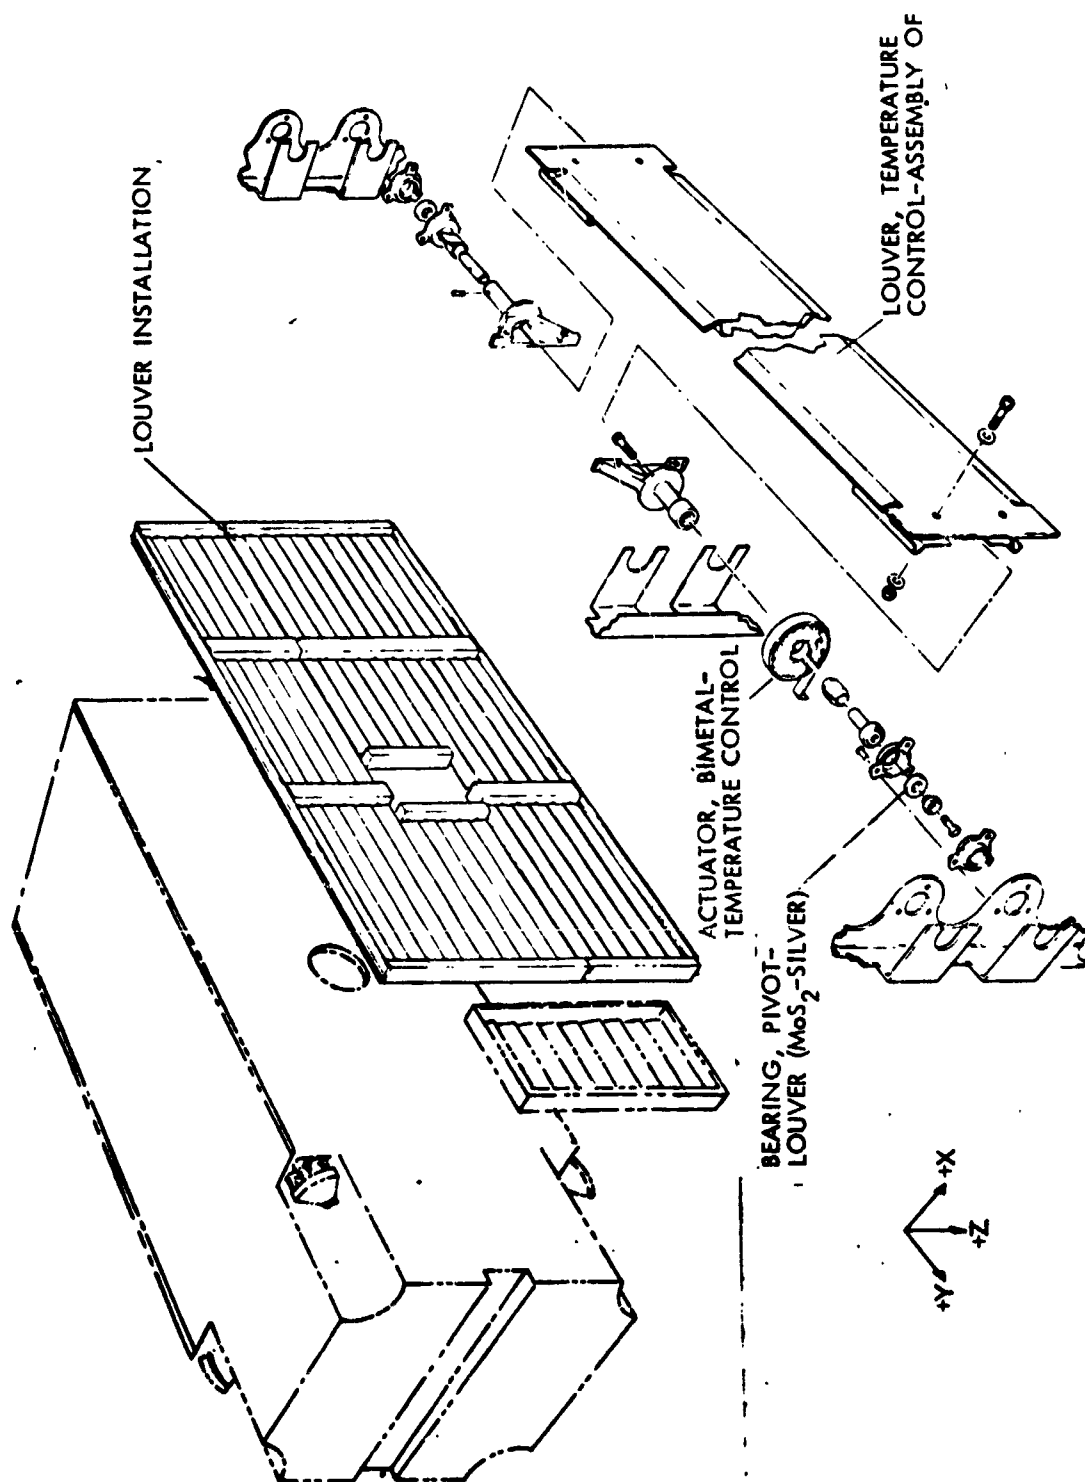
Thermal Louver Assembly (OGO Spacecraft)
